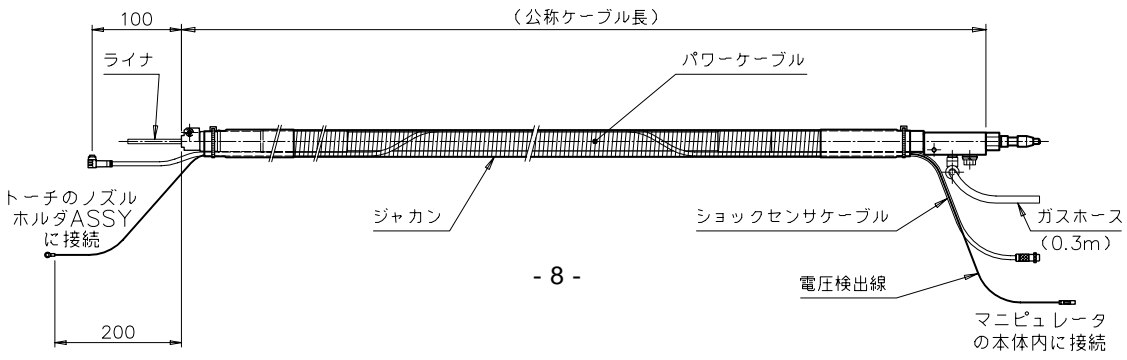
Outline drawing of the coaxial power cable (For V4AP/V4LAP DL W.P.S. exclusive use)
